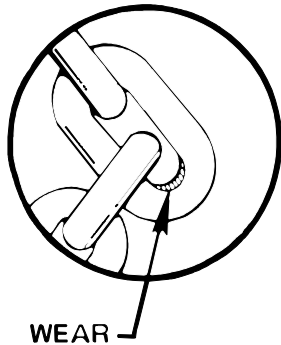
Check Chain Wear at Bearing Surfaces Between Links
